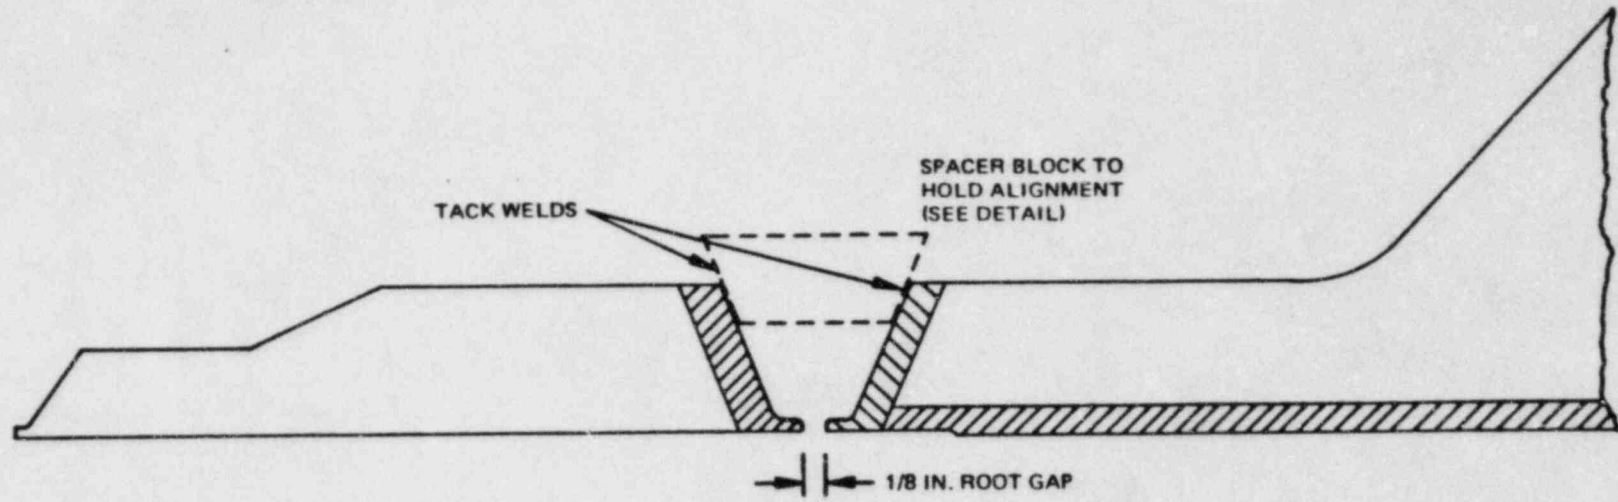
Field Weld Technique for Safe-End Installation
